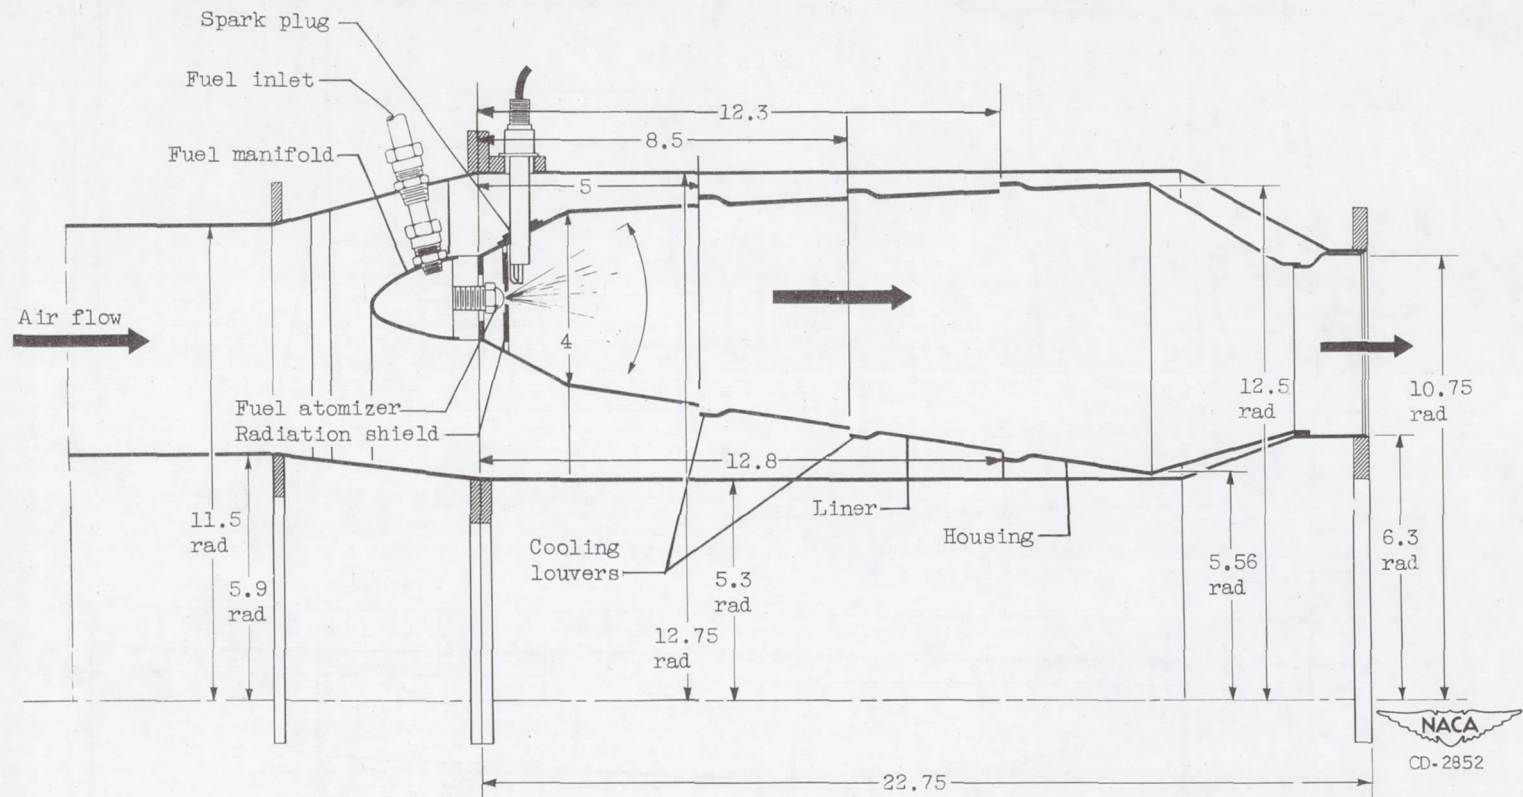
Longitudinal cross-sectional view of combustor and housing. (Dimensions are in inches.)
